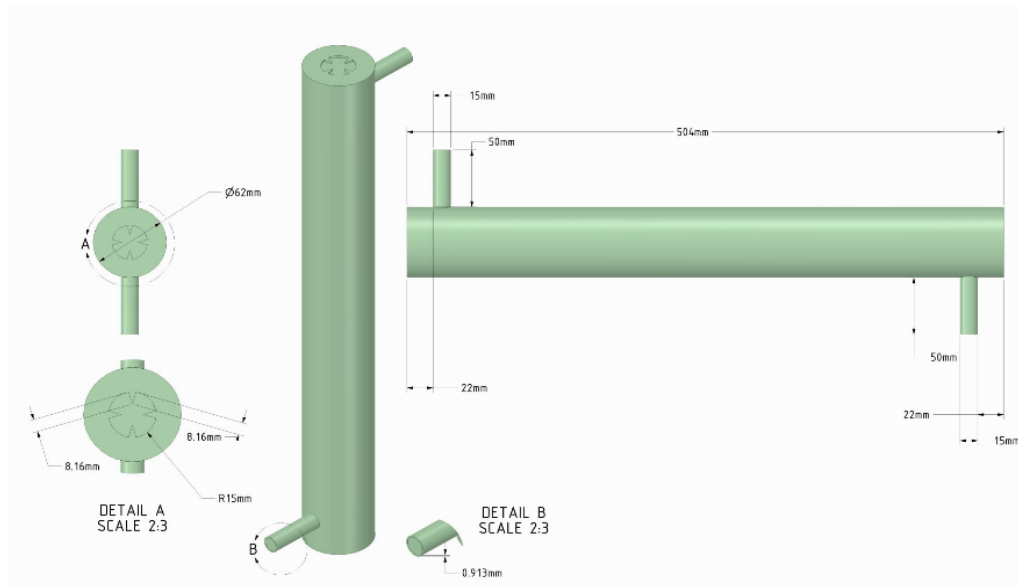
Engineering drawing of the tube-in-tube heat exchanger [3]
